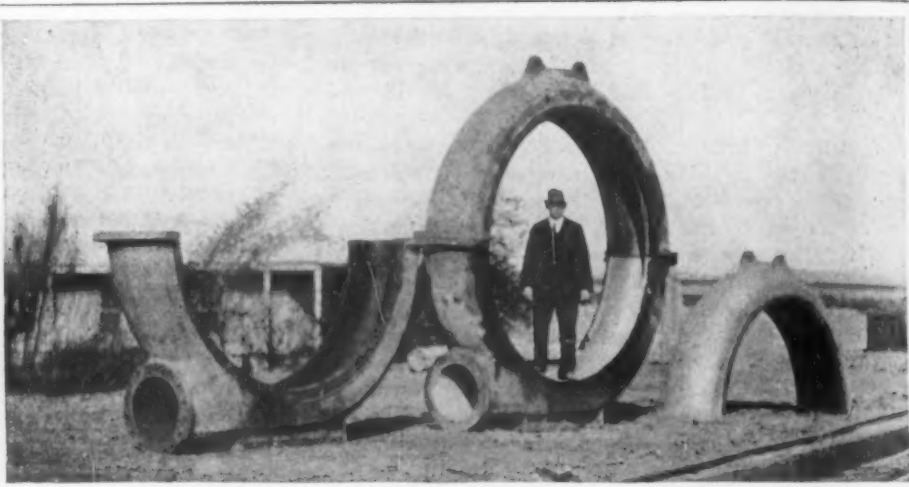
Separate and Assembled Casings for a Twenty-inch Suction Pump, Weight 5600 lb.
